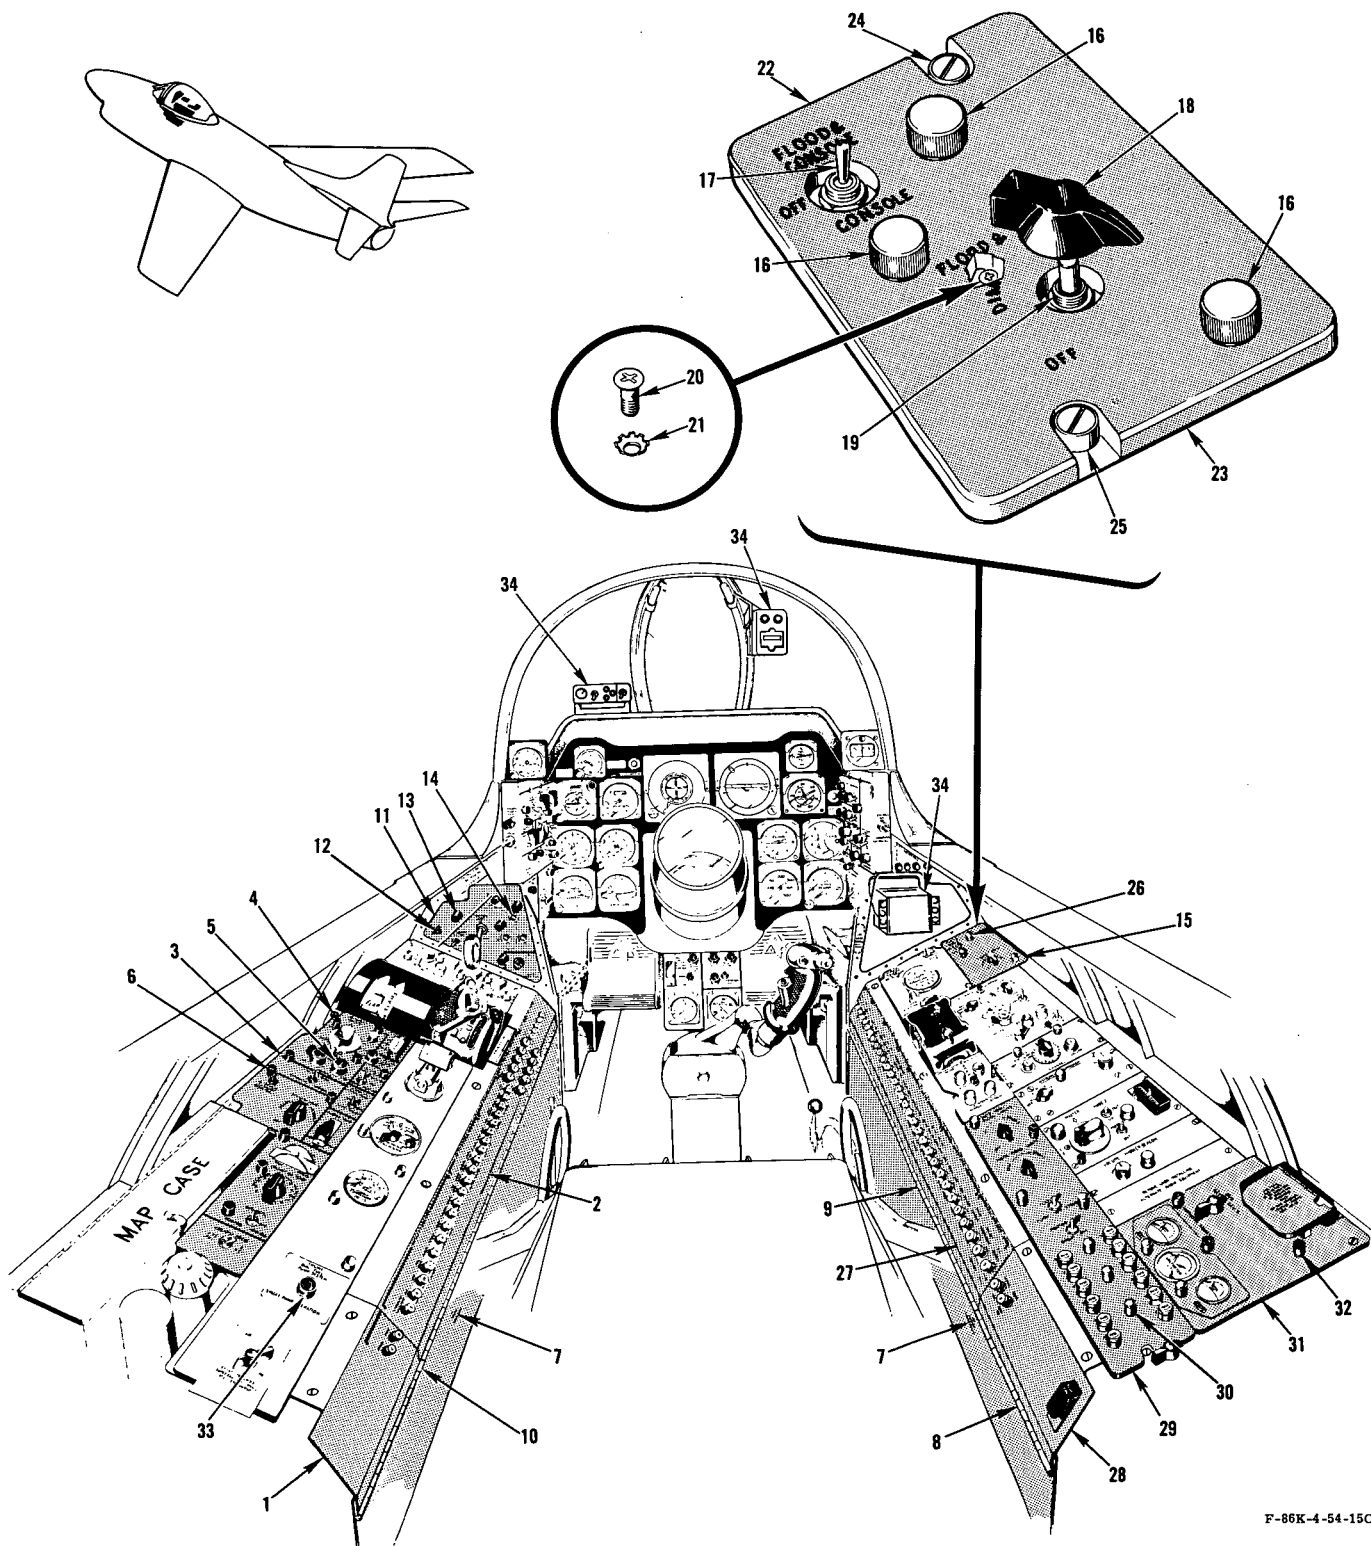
COCKPIT ELECTRICAL EQUIPMENT
